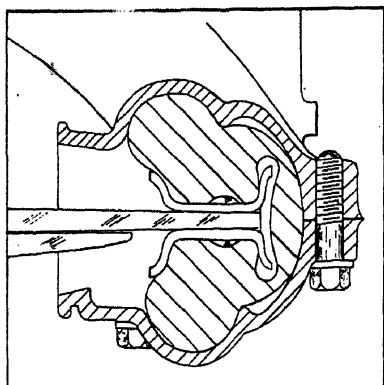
Solid Rubber Mounting for Spring Ends.
